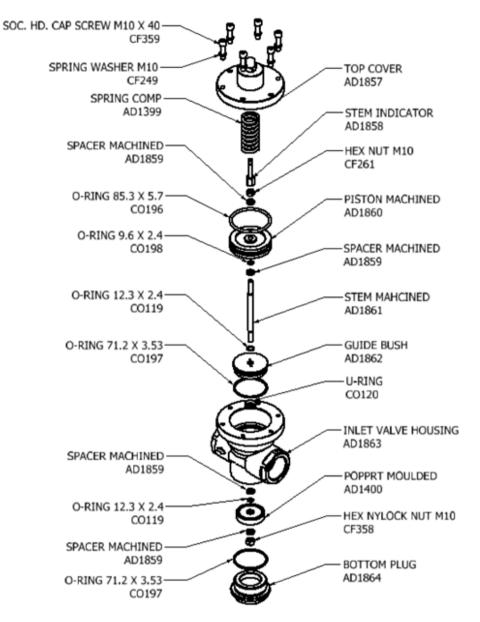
Exploded view of inlet valve assembly-Dryspell Plus model 300 & 375
